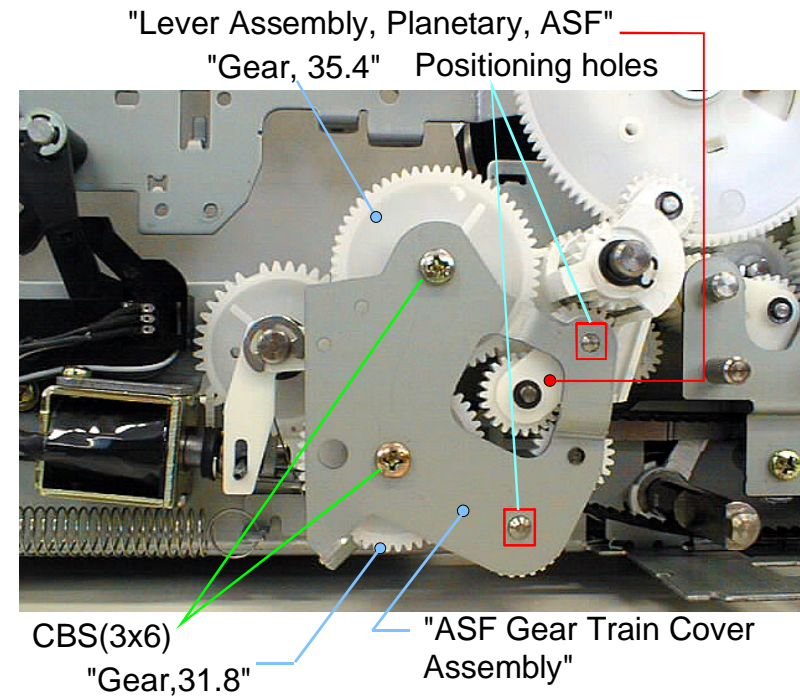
Installing "ASF Gear Train Cover Assembly"
